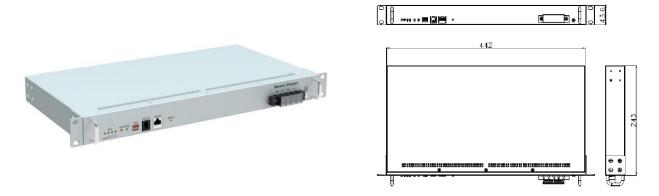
Appearance and Mechanical Drawing of U3C-10P-48V-A
